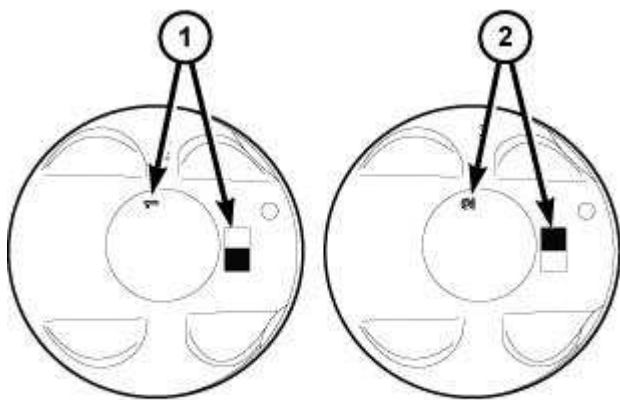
Engine Block Cylinder Bore Diameter Grade Markings & Engine Block Main Bearing Journal Diameter Grade Markings
